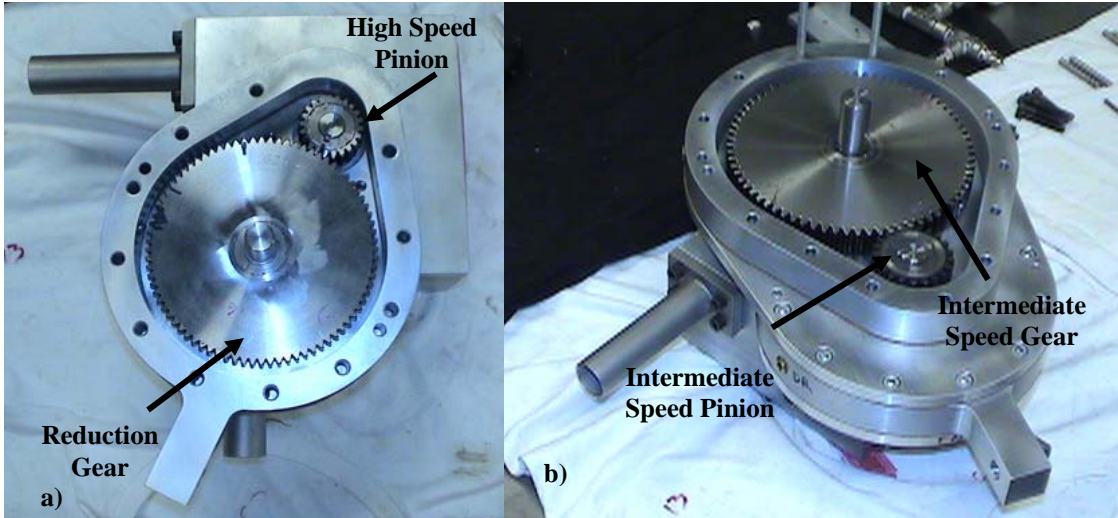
Pictures of the gear train assembly. a) Shows first stage assembly on top of steam turbine. High Speed Pinion and High Speed Gear. b) Second stage assembly atop of stage one. Intermediate Speed Pinion and Intermediate Speed Gear.
